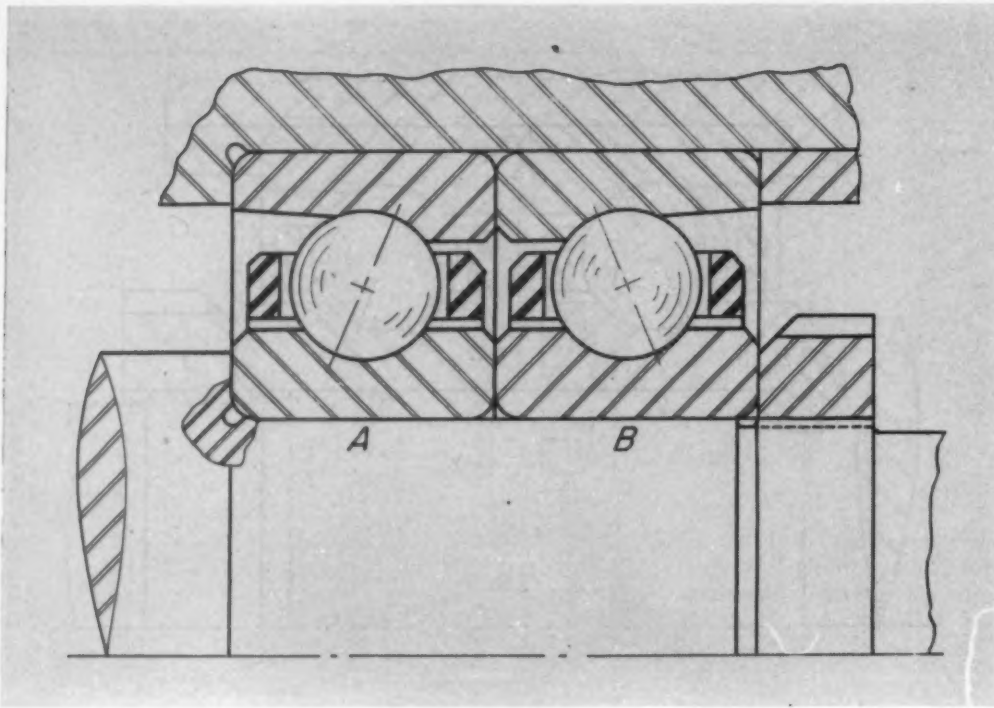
Bearing arrangement of Fig. 15 shown under full preload with inner rings just touching
